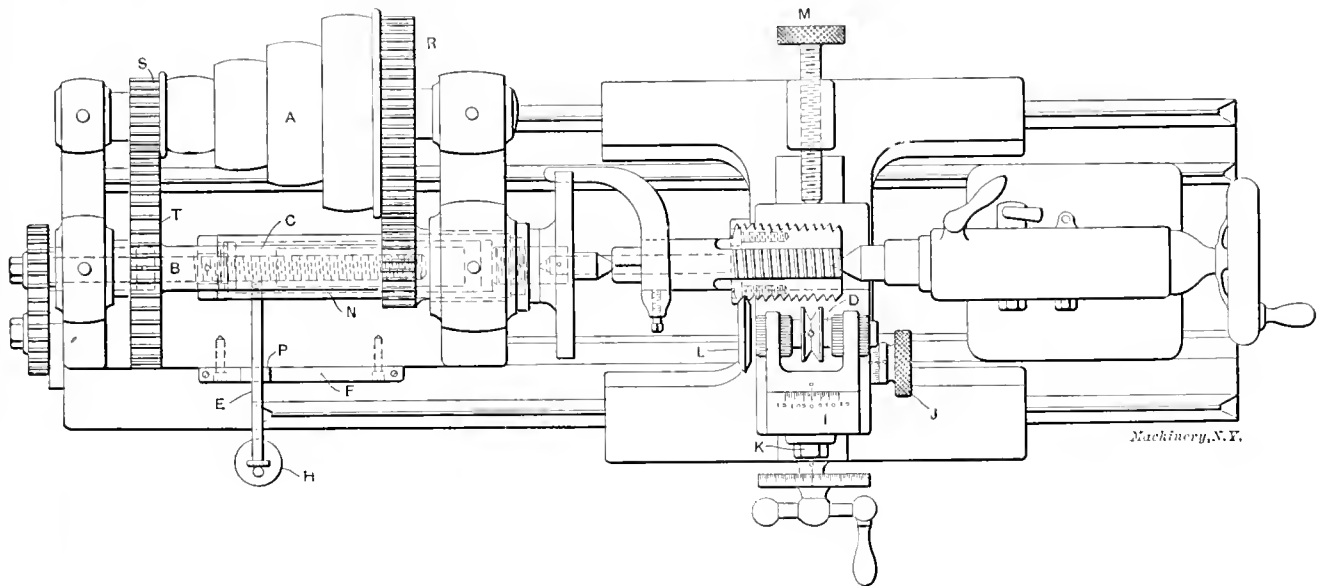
Lathe for Grinding Taps in the Angle of the Thread.
